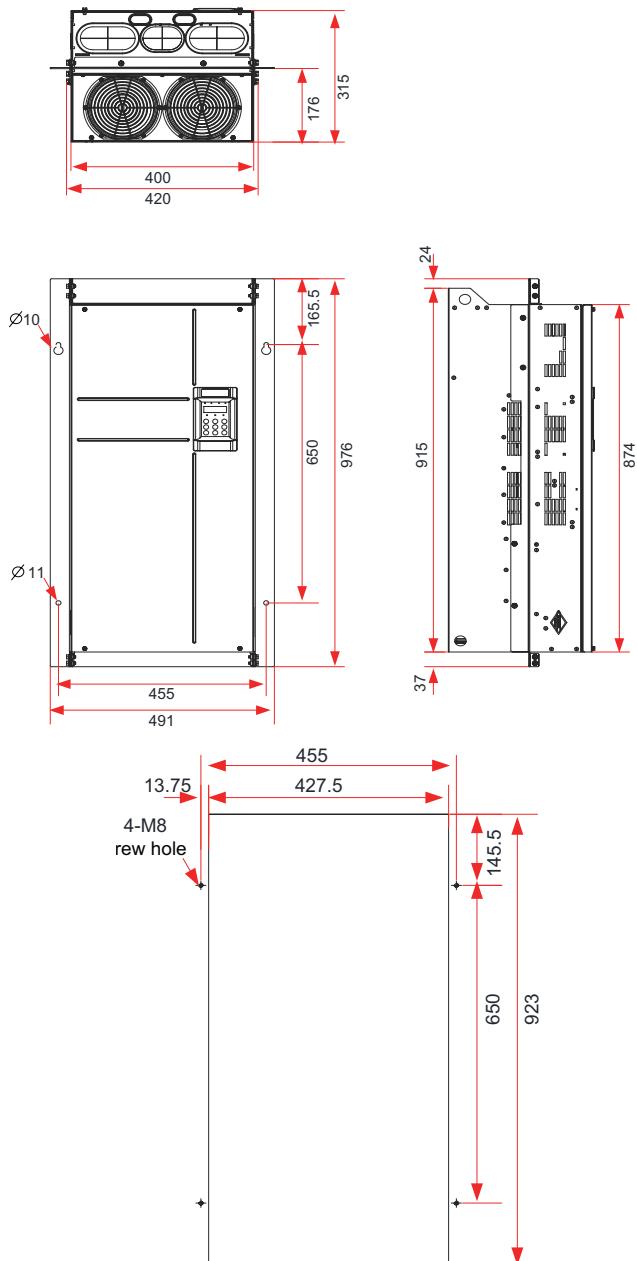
Through-hole mounting bracket and mounting hole dimensions for 132-160 kW AC drive models (mm)
